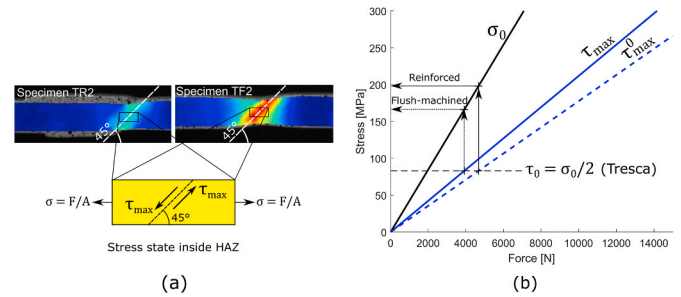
Evaluation of the conditions leading to shear fracture on the aluminium side of the Al-steel HYB butt weld during tensile testing; (a) Location of the maximum shear stress inside the tensile specimens, (b) mechanical response of the flush-machined and fully reinforced tensile specimens to the applied tensile loading.
